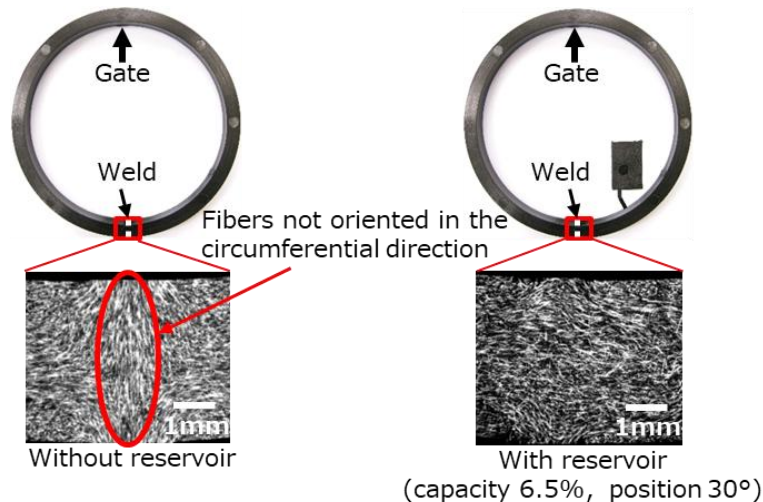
Fiber orientation around the weld of the ring specimen
